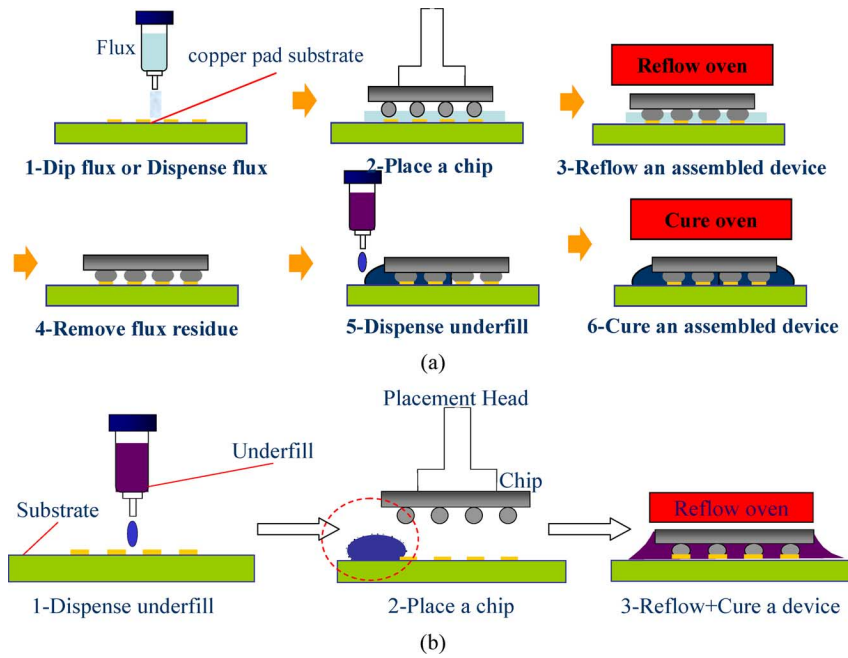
Flip chip assembly process. (a) Conventional assembly process and (b) Hybrid no-flow assembly process [13].
